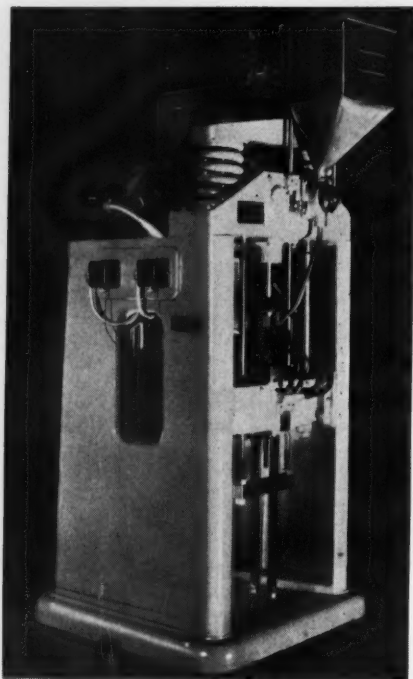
Stokes press for automatic molding of thermosetting materials, the latter being fed from the hopper at top. Actuation is by worm gearing, the heavy coil springs being compressed to maintain pressure on the mold when the latter is closed.
